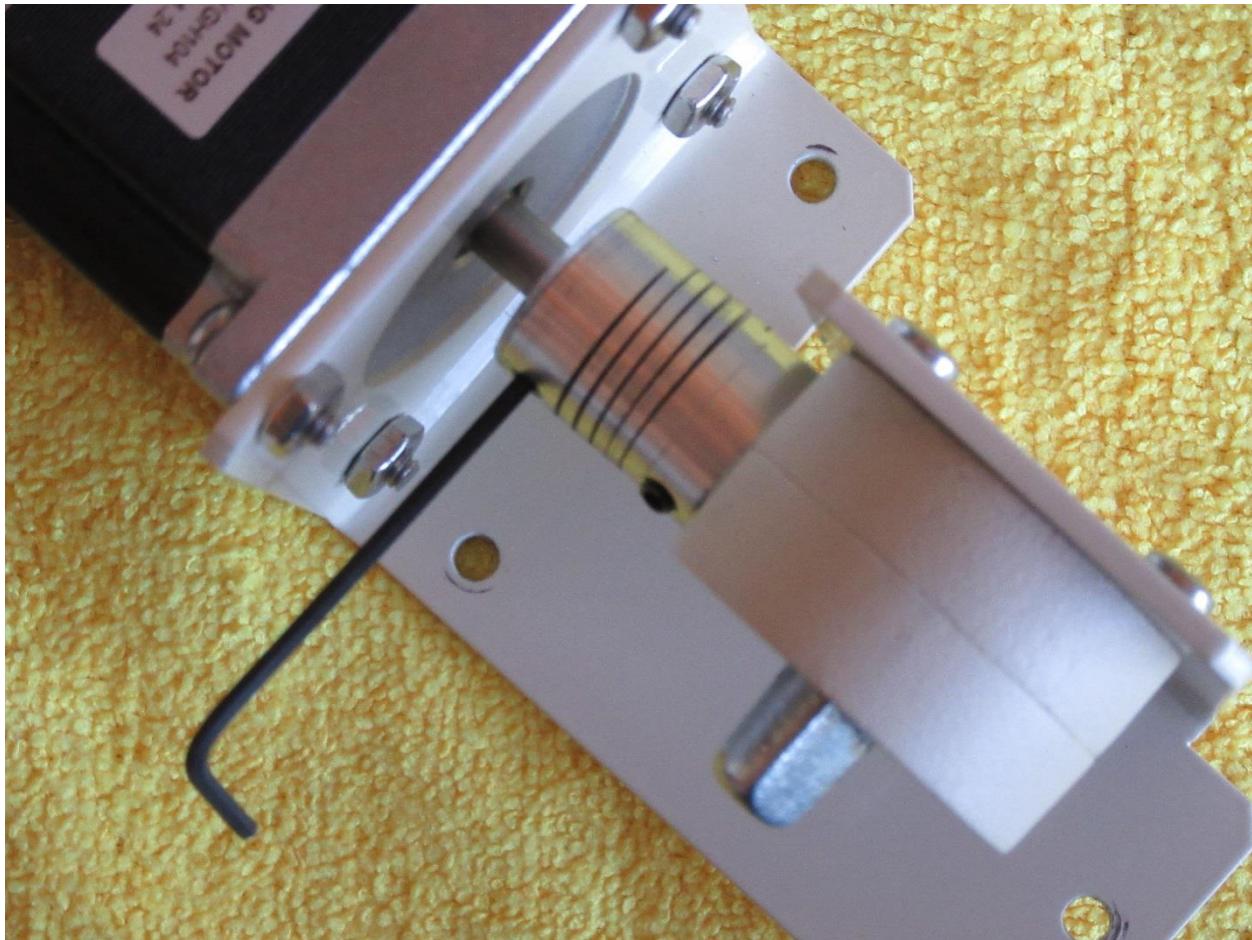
Using Allen Wrench to Rotate Motor Shaft while Adjusting Worm Gear Position on Bracket
